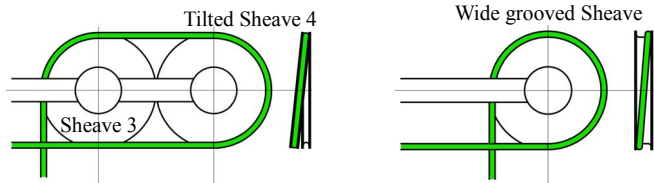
Adoption of tilted sheave or wide grooved sheave to avoid the cable crossing
